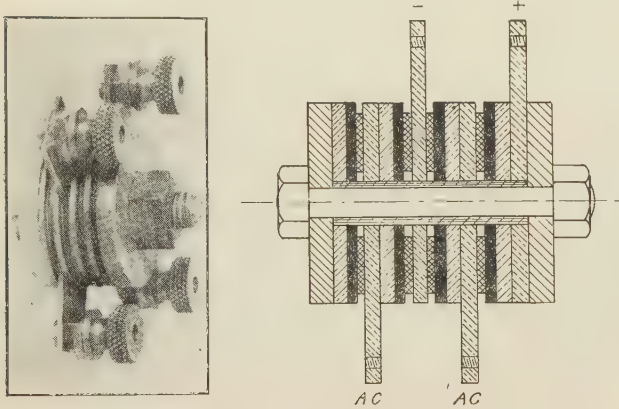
ASSEMBLY OF FULL WAVE RECTIFIER
